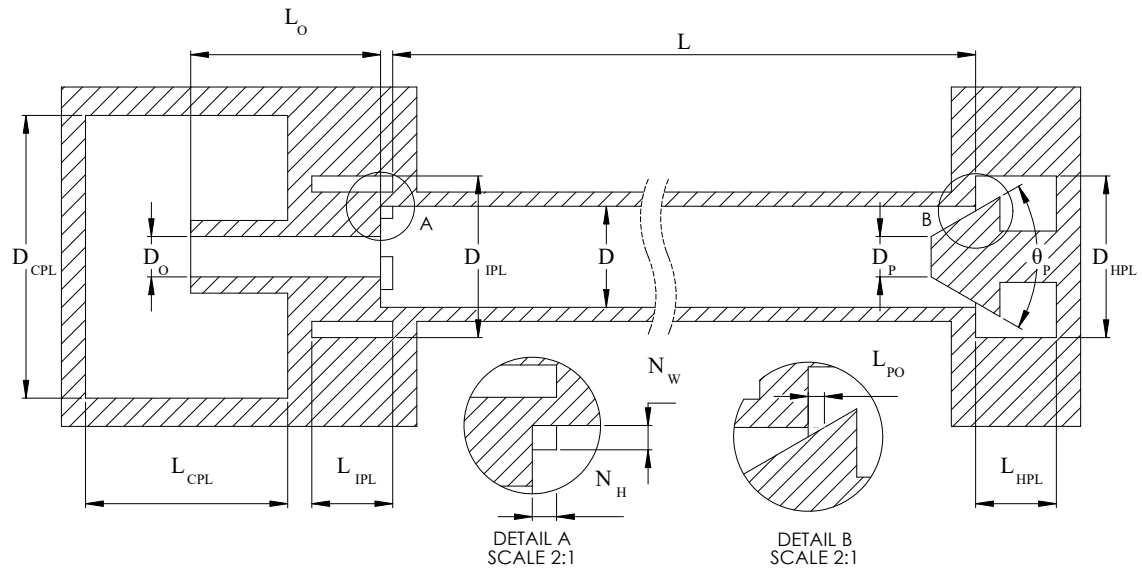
Sectioned drawing of the Ranque-Hilsch vortex tube used in this research, showing the relevant dimensions (given in table 4.1), including the hot and cold plenums
